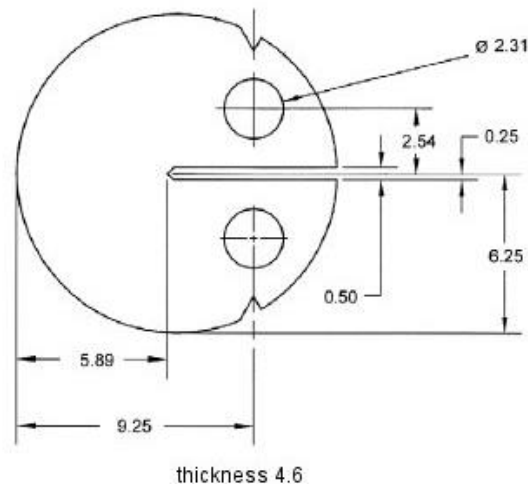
Geometry and dimensions of DCT specimen (in mm) [68].
